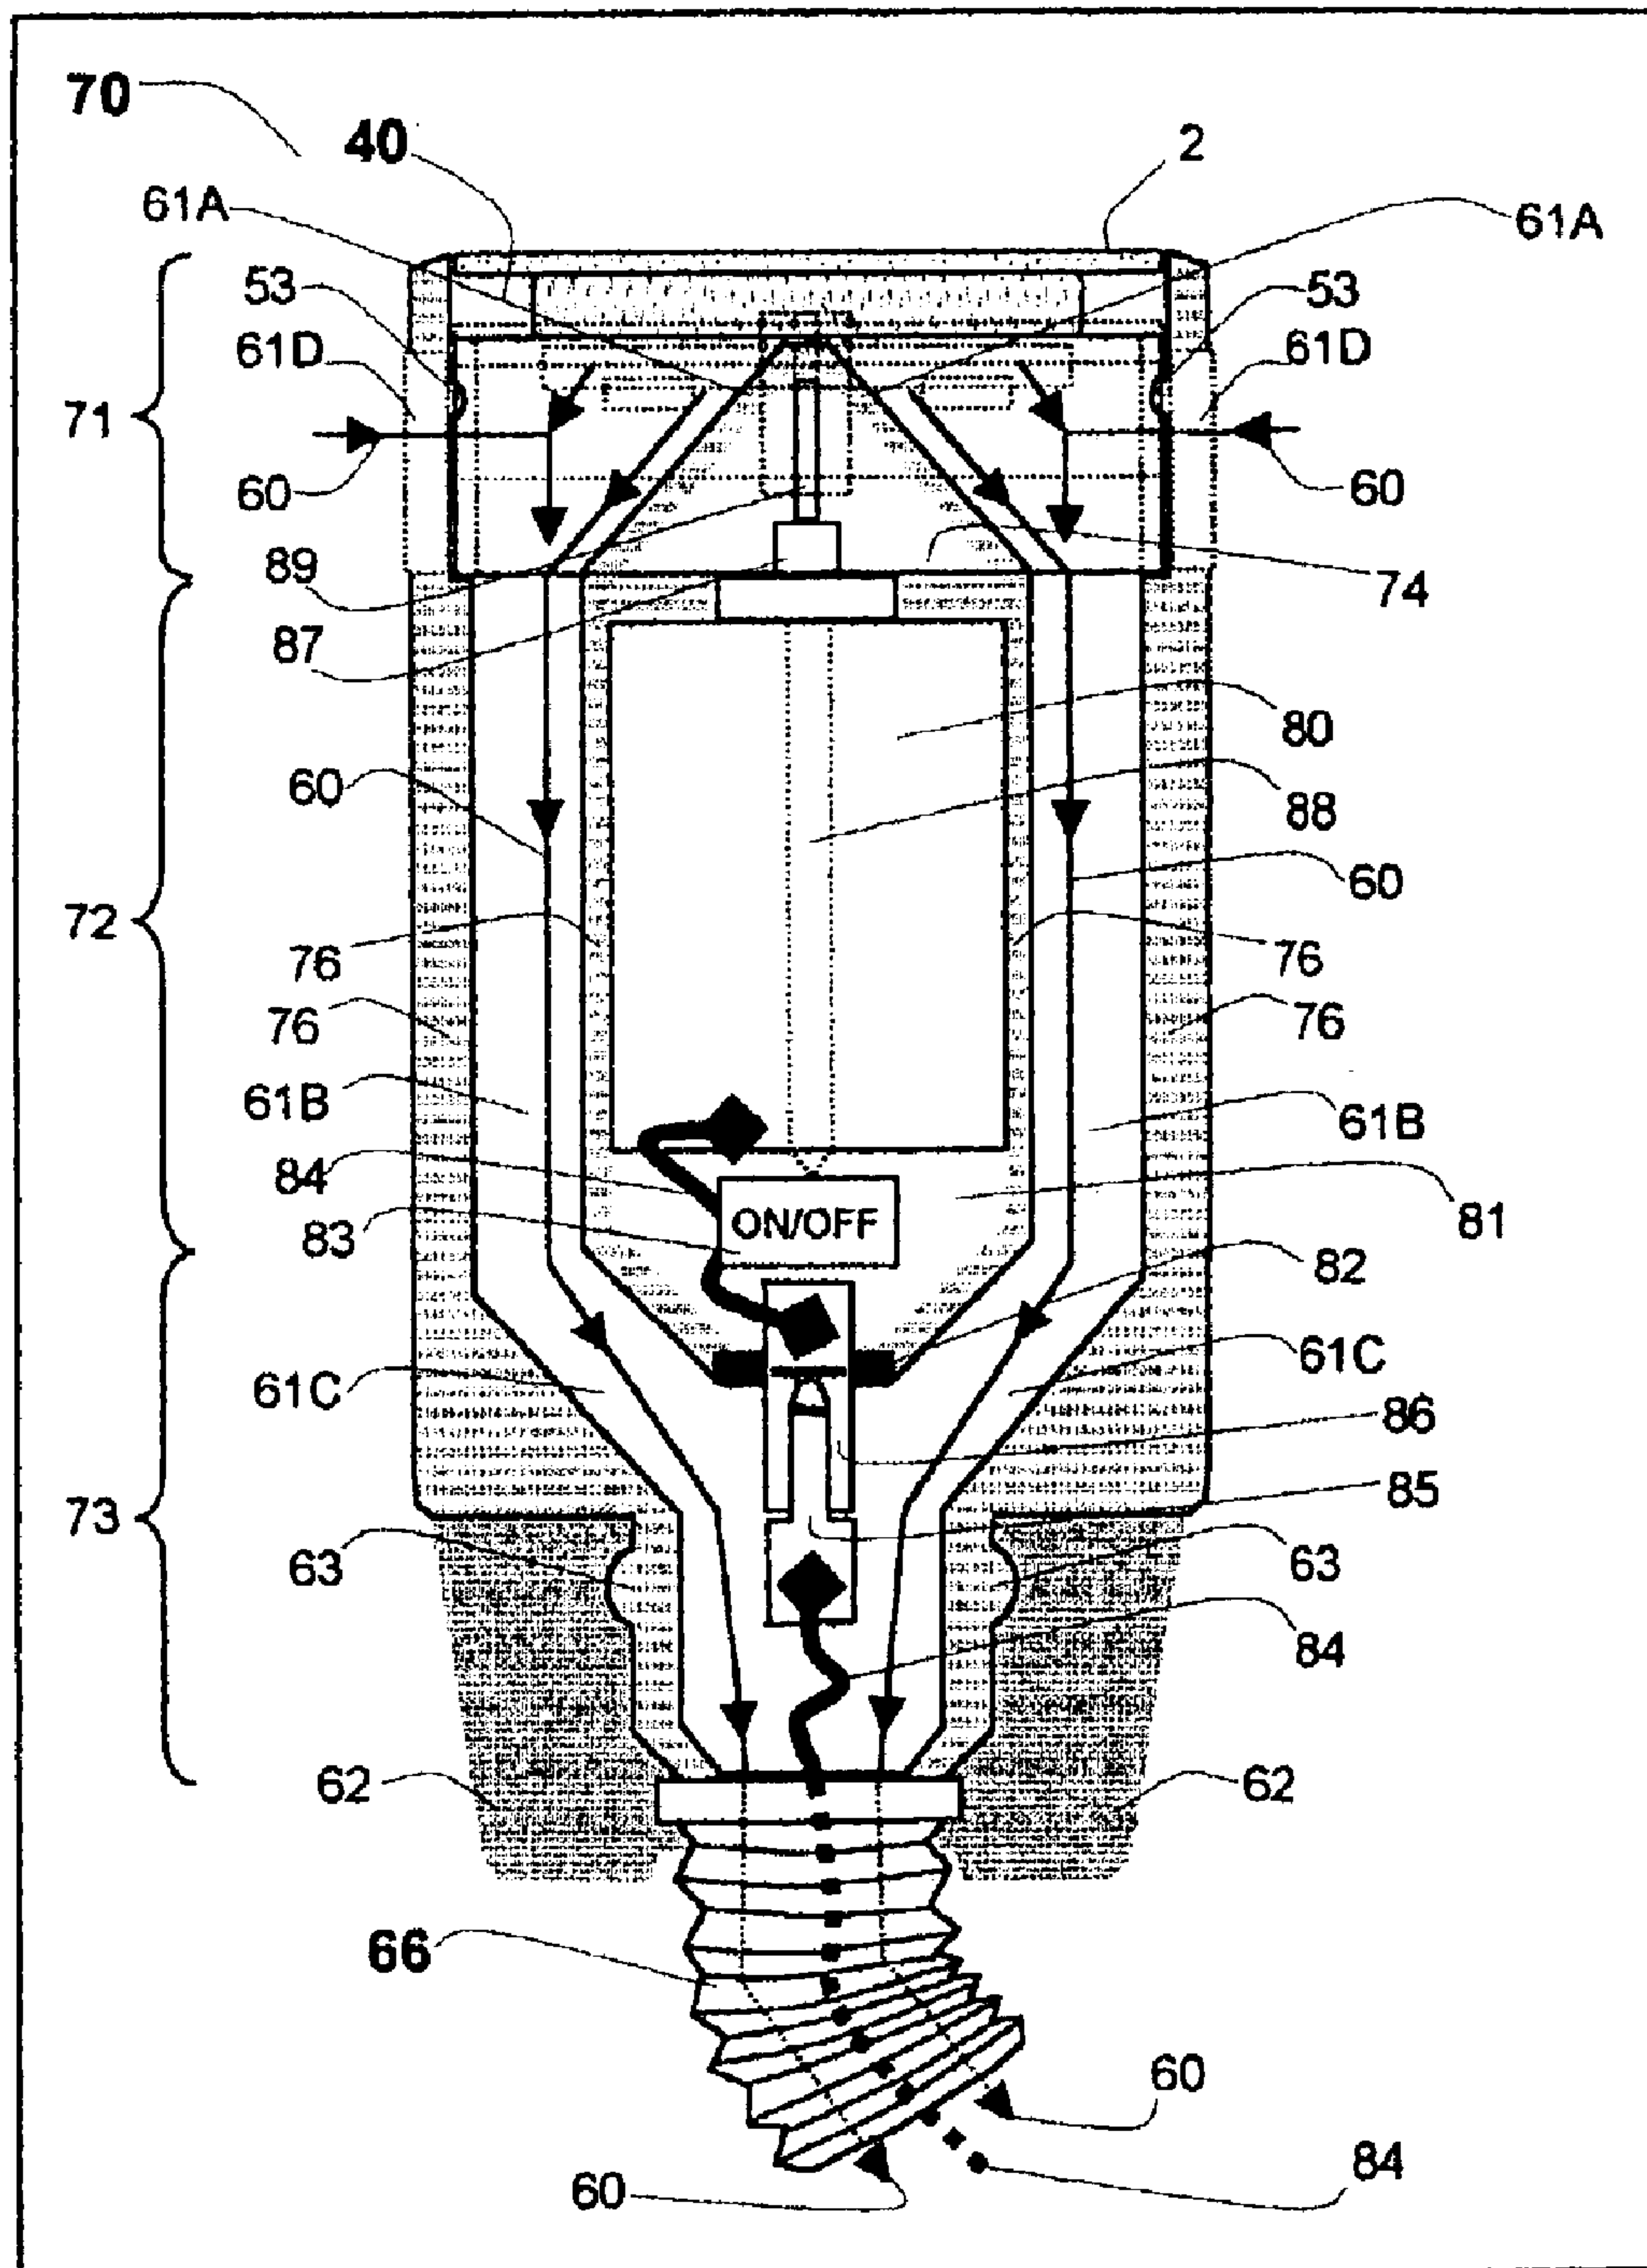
CLIPPER & BLADE ASSEMBLY:
